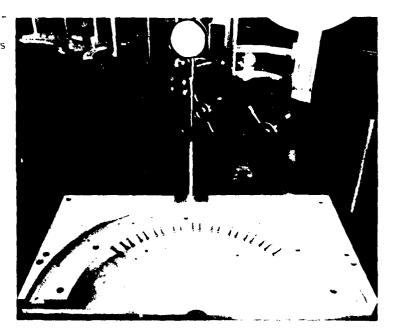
Device used to establish the relative parallelism of the head-plate and the base-plate of the testing fixture.
